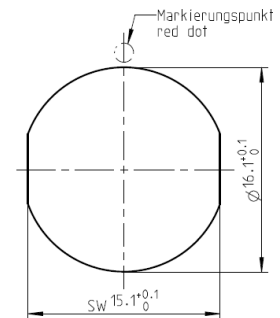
Panel cut out in cabinet for IDs 13709, 13710, and 13711; numbers refer to mm
